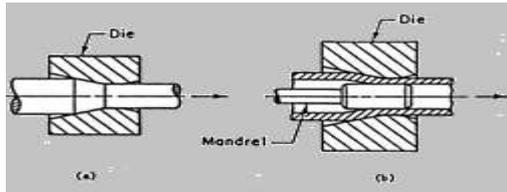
(a) wire and bar drawing and (b) Tube drawing
